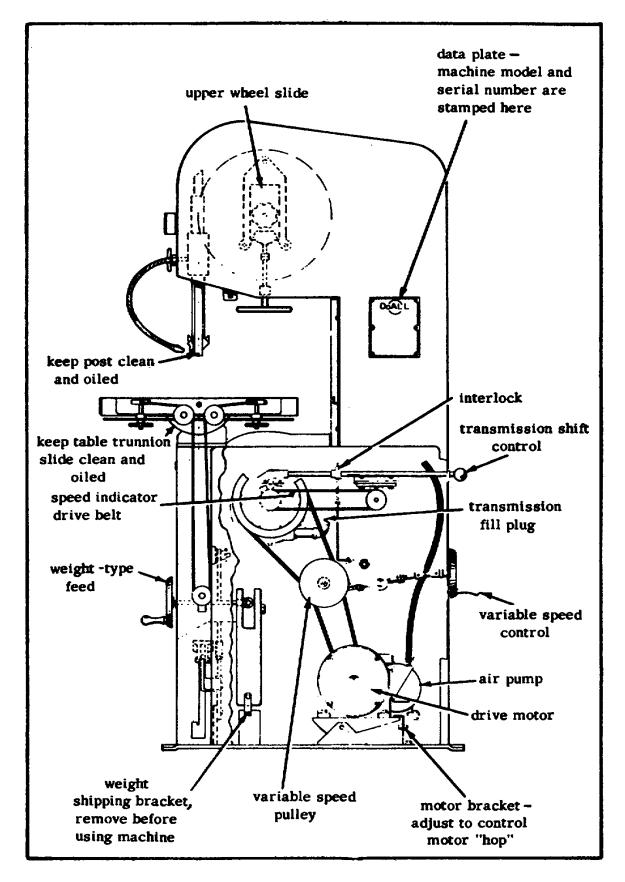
Rear view of Model 1612-0, showing maintenance and service locations.
